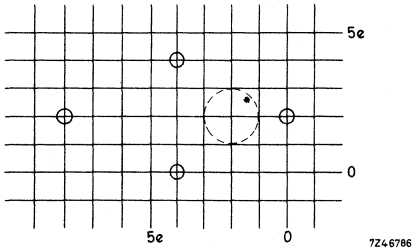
Hole pattern for mounting on a printed-wiring board ($e = 2,54 \text{ mm}$ (0,1 in)); grid hole diameter $1,3 \pm 0,1 \text{ mm}$.
